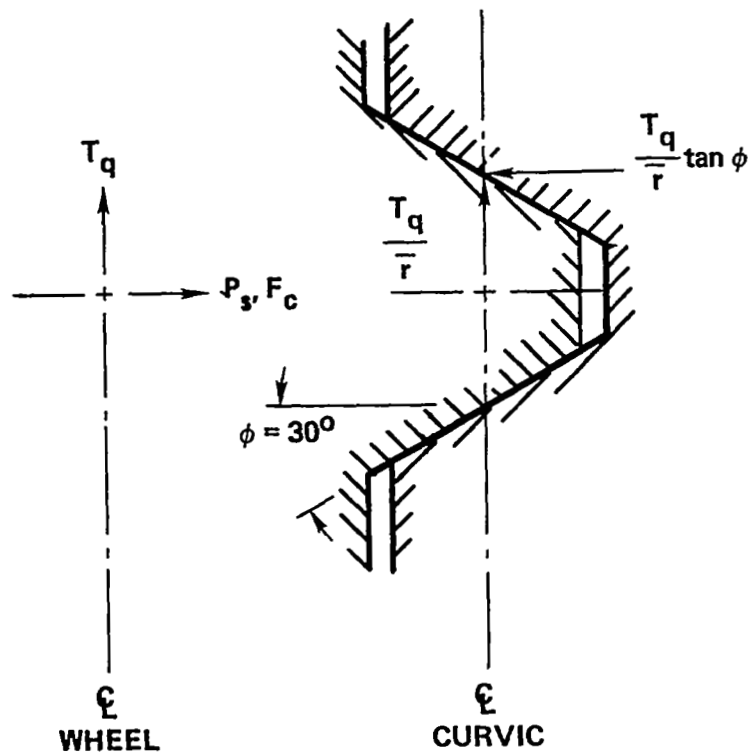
Curvic Coupling Rotor Assembly.
